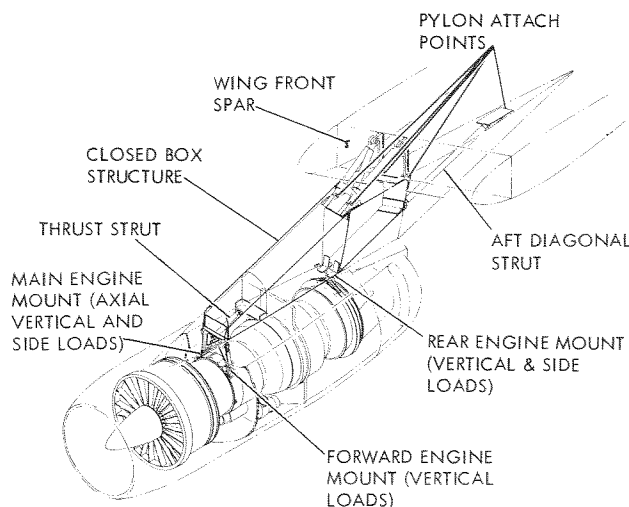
ENGINE MOUNTING AND PYLON STRUCTURE.
